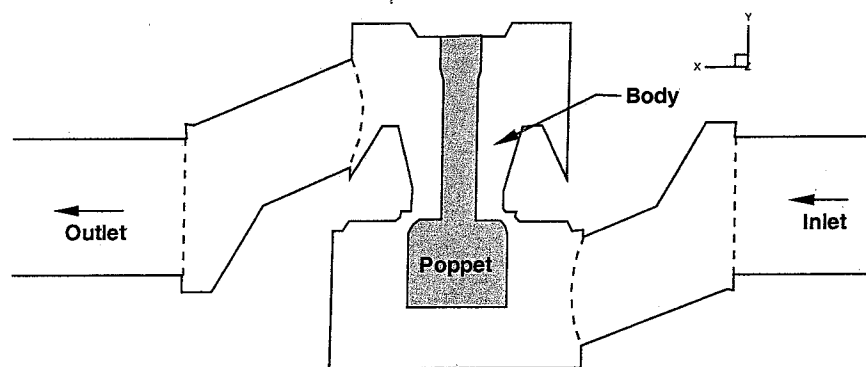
Schematic drawing of a cross-section of the pressure regulator valve showing the inlet, outlet, poppet, and body.
